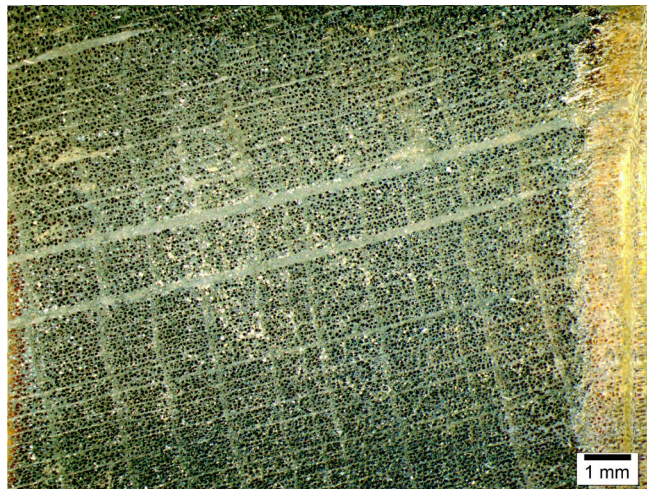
View of wood cut edge - 13 mm thick. CO_2 laser, working gas: air, working gas pressure: $p=2$ bar, power: $P=1500$ W, cutting speed $v=2,0$ m/min
